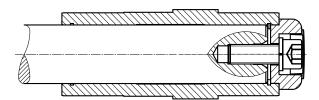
Gear unit mounted to shaft without a shoulder using the fastening element
